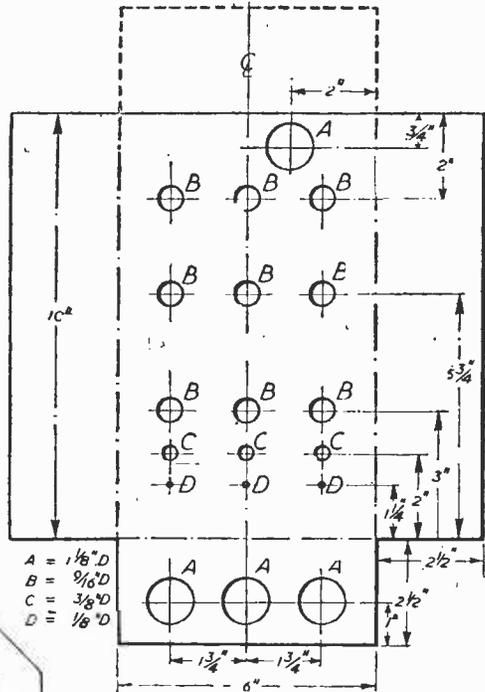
Chassis cutting and drilling data for the units shown on page 31.
